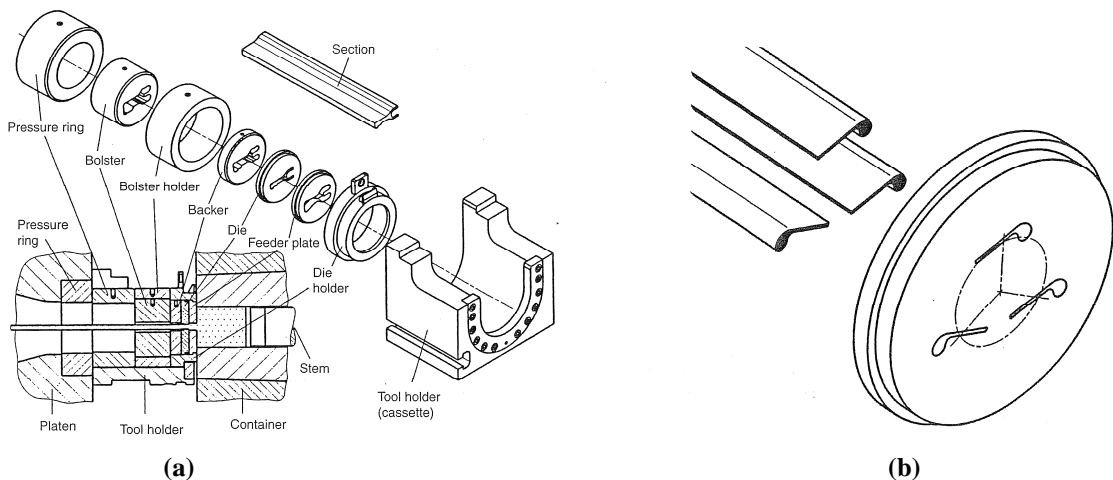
Assembly of the tool set (a) for the production of solid sections and example of flat extrusion die (b) with three shape forming apertures for the extrusion of aluminium alloys. [Bauser et al.,2006]
